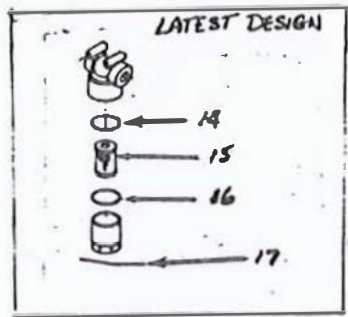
Primary fuel filter and manifold heater fuel filter assemblies.
